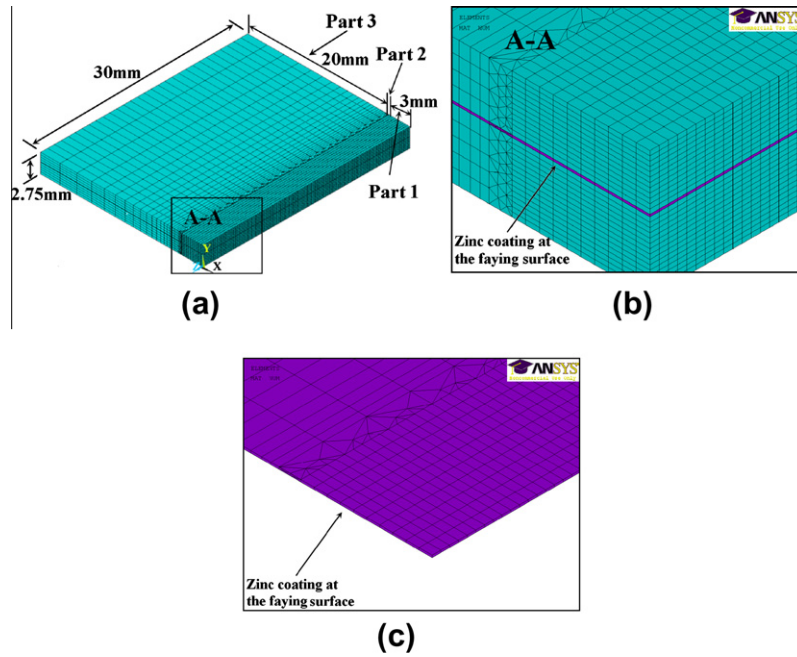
Schematic view of the dimensions of the meshed coupon: (a) general view, (b) close-up of weld zone, and (c) the zinc coating at the faying surface.
